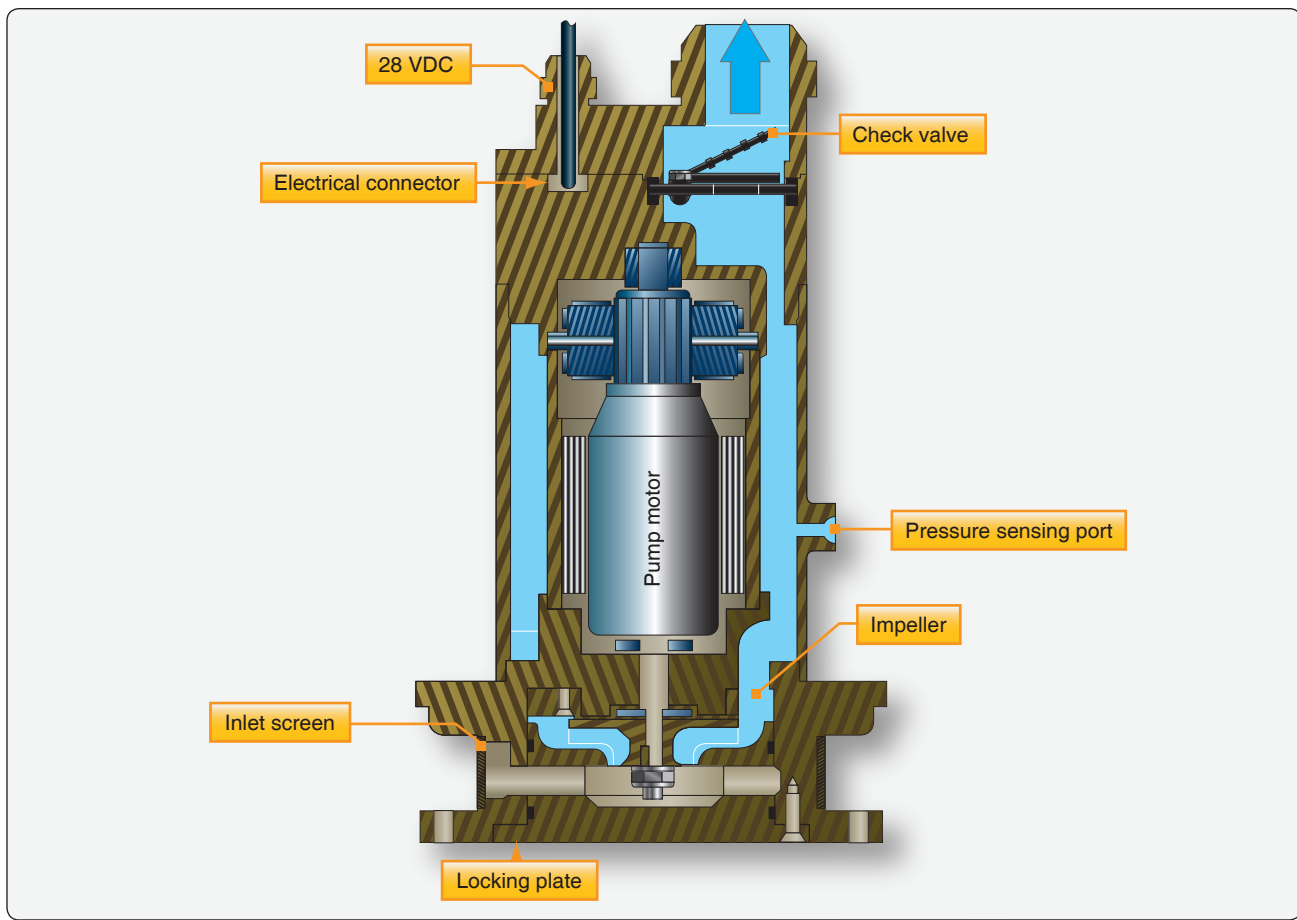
The internal workings of a centrifugal fuel boost pump. Fuel is drawn into the center of the impeller through a screen. It is moved to the outside of the case by the impeller and out the fuel outlet tube.
